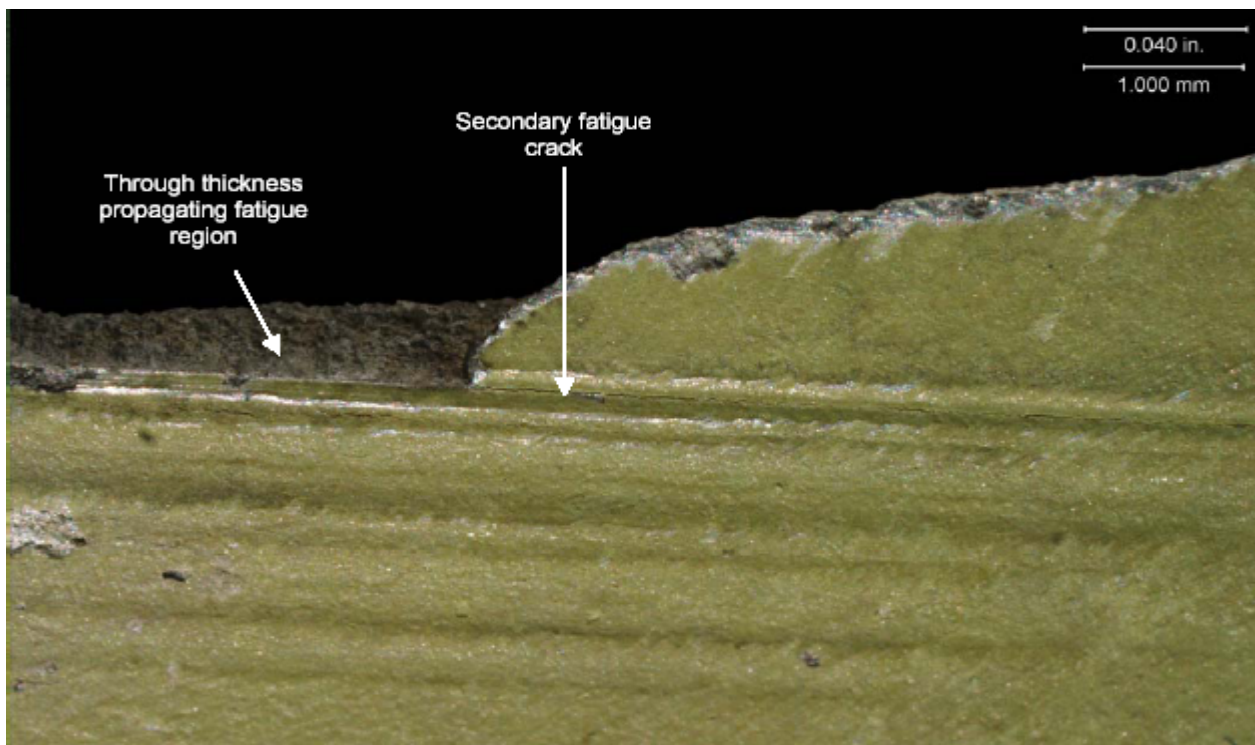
Surface of skin faying with repair doubler between hole 29 and hole 30 showing the longitudinal scratches in relationship to this fatigue crack. Note the secondary crack extending out of this common scratch.
